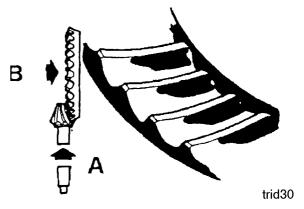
indicates that the pinion is set correctly. This gives a quiet drive and long life.
